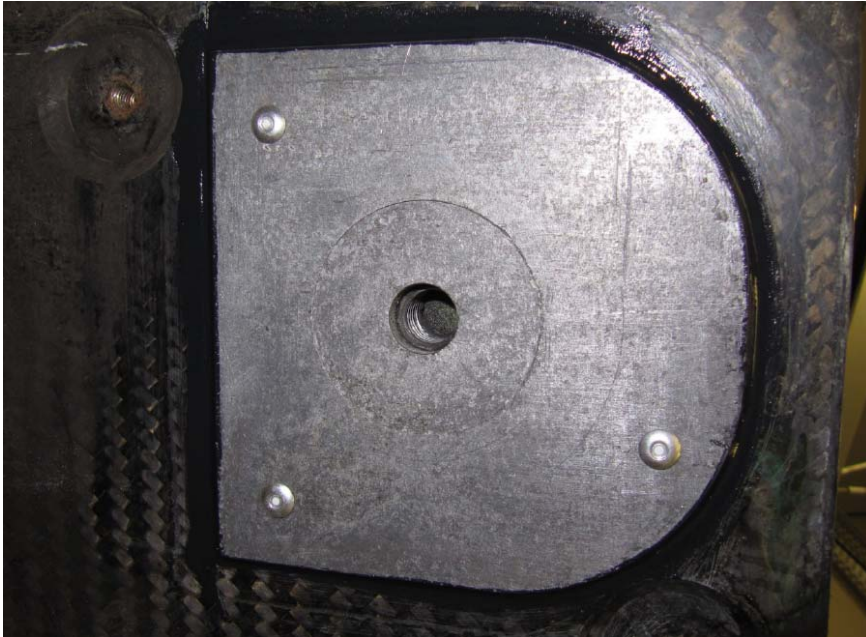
RPS Plate surrounding seal with Scotch-Weld DP 490 (DA 001 730 A2)
